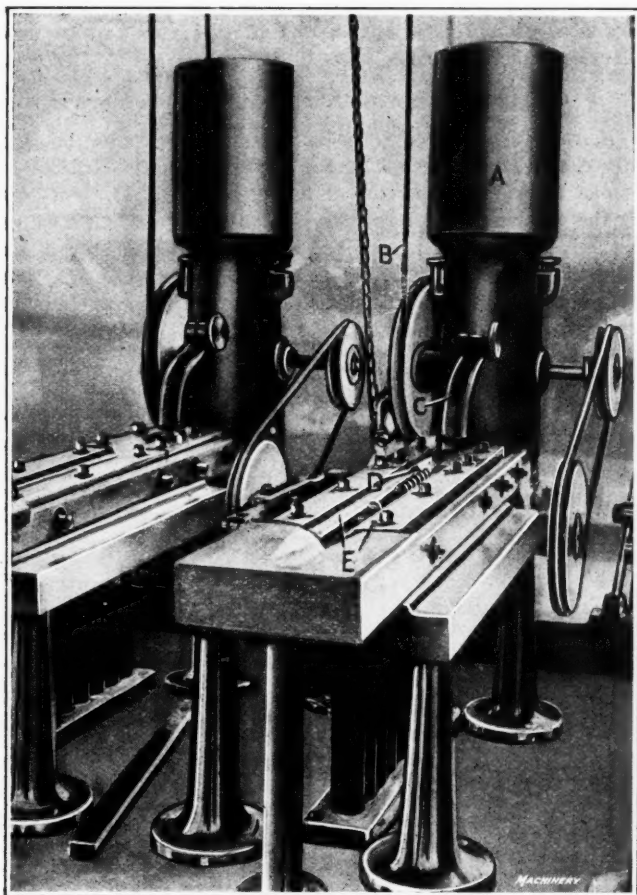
Automatic Ball Gaging Machine for inspecting Balls up to $\frac{5}{8}$ Inch Diameter
